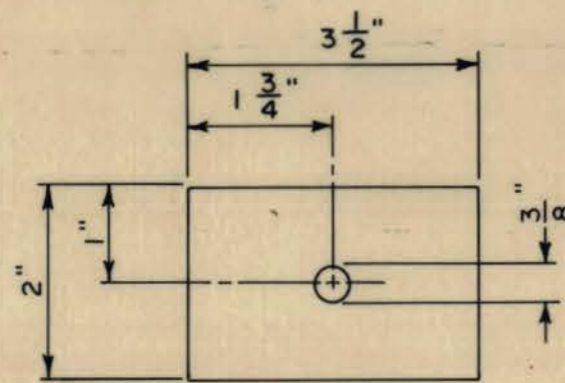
DETAIL SHOWING DELINEATOR ASSEMBLY ATTACHED TO RDWY. SIDE OF RECTANGULAR TUBE RAILING
